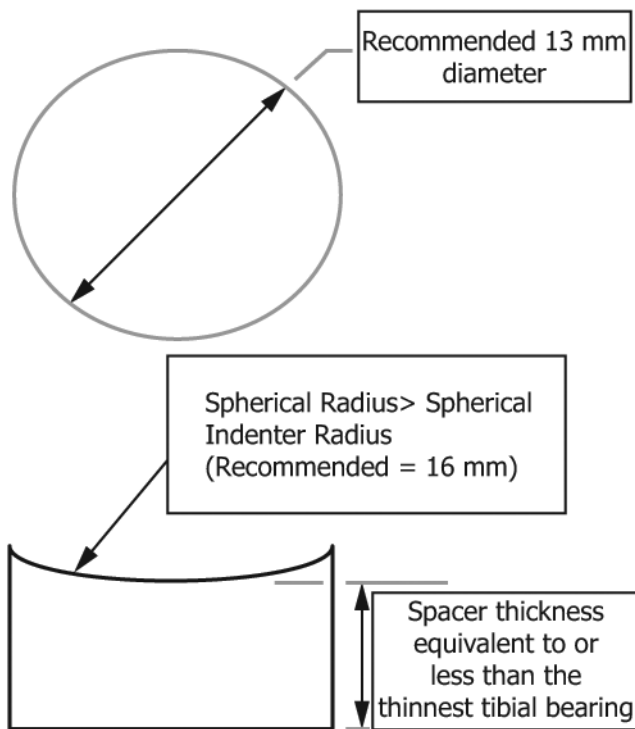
Suggested Spacer Drawing with Concave Top Surface Cross Section Shown on Bottom Image
